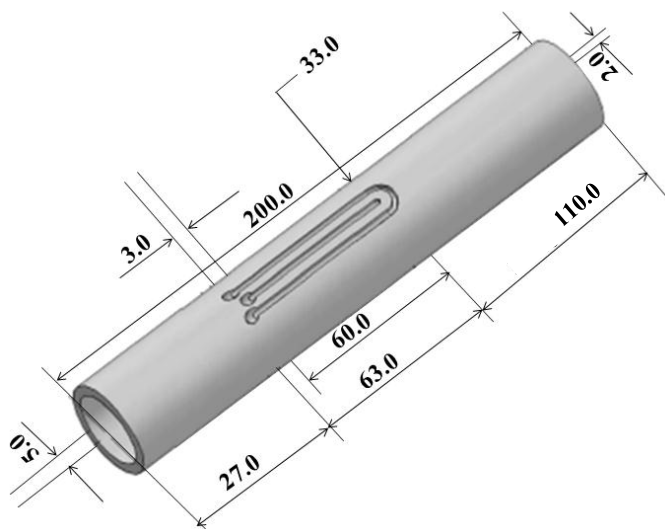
Development of reusable probe in 3 - dimensional view.
